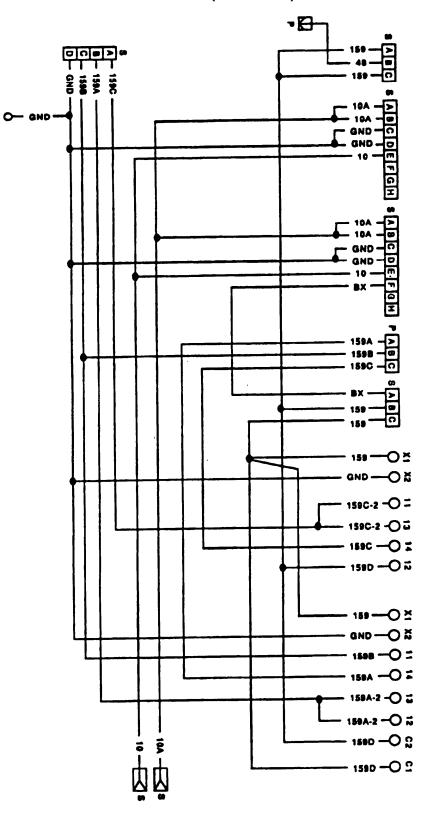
Accessory Control Box To AFES Harness (12351461)
